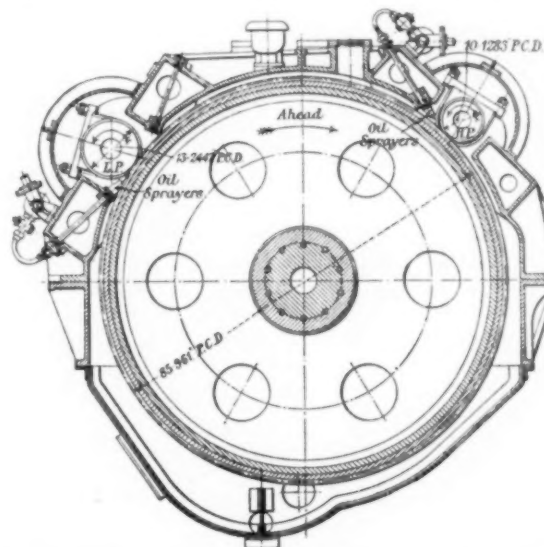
SECTION THROUGH A GEAR CASE FOR A TORPEDO-BOAT DESTROYER SHOWING RELATIVE POSITIONS OF PINION AND WHEEL AND LUBRICATING ARRANGEMENT FOR THE TEETH
